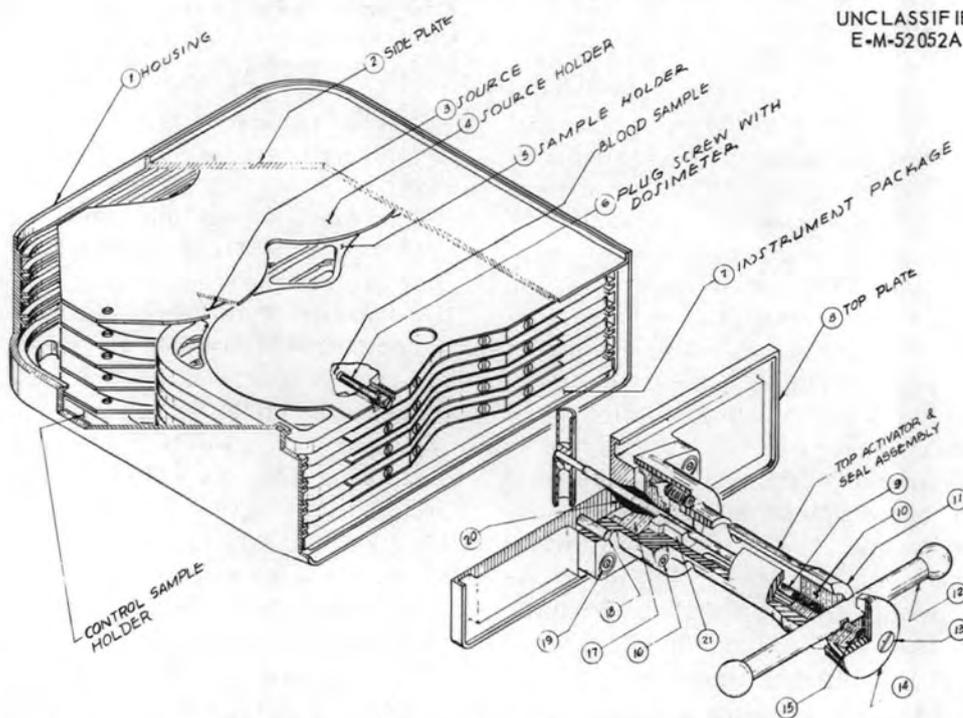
Cutaway Drawing of the Modified BIG-I Device Showing Details of the Modified Operating-Handle Assembly.
